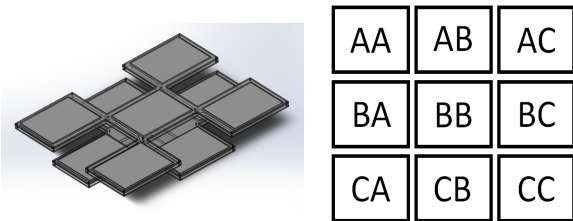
Drawing of Basic 9 Solar Panels Assembly.
